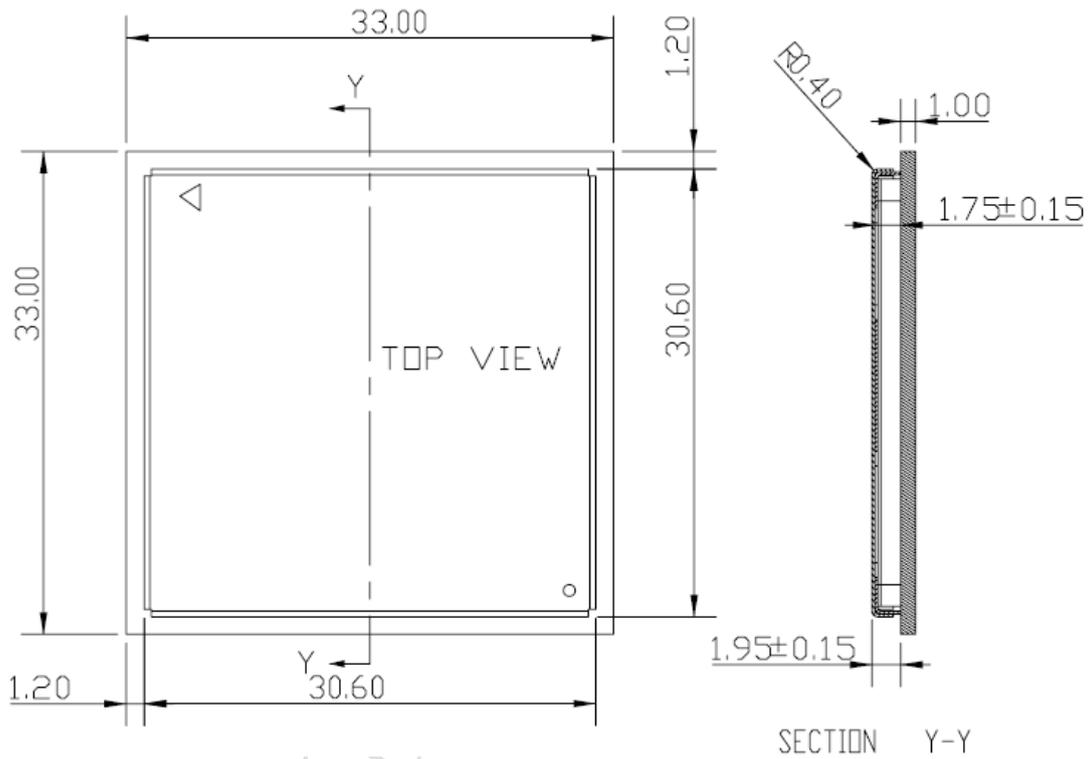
SIM500W TOP view and SIDE view (Unit: mm)
